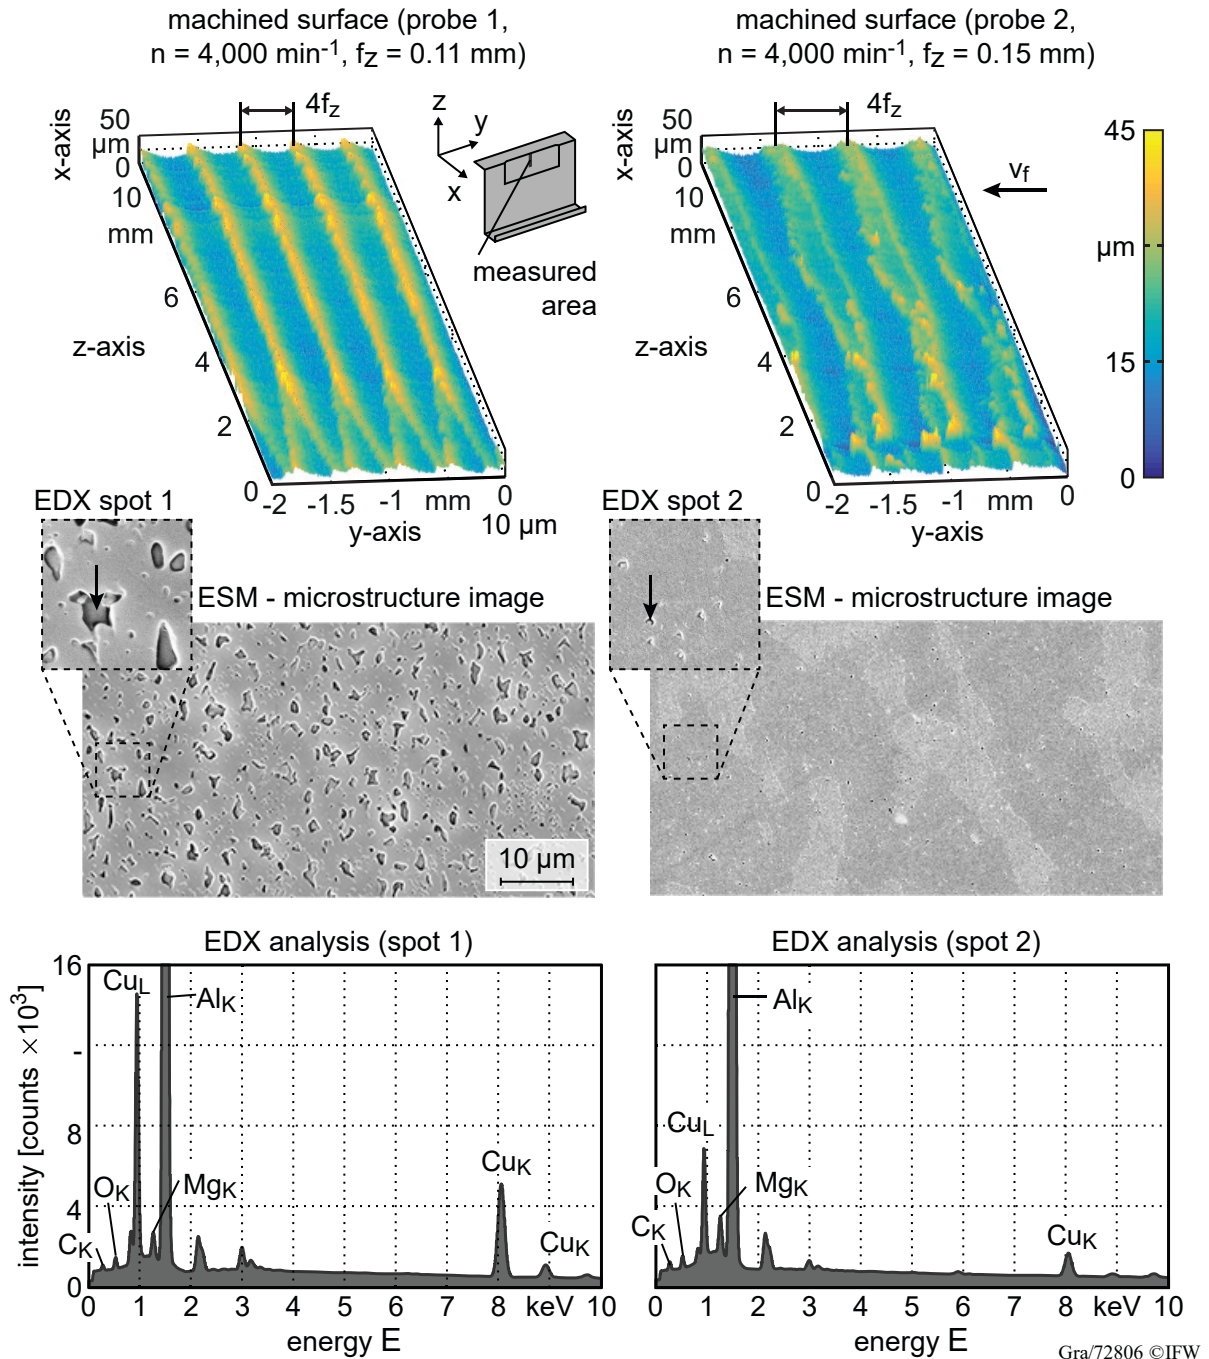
Analysis of the micro-structural properties of the workpieces (machined by the tool with chamfered cutting edges).
